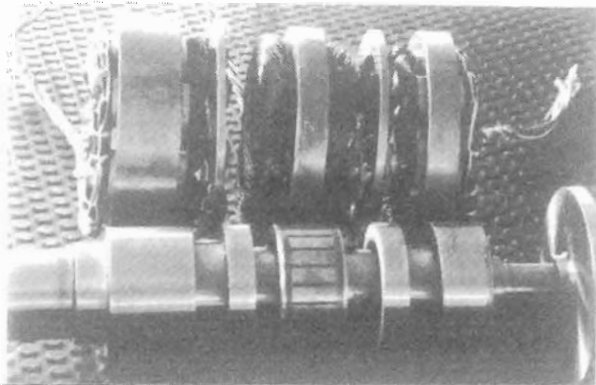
Stators of the radial actuators, sensors and of the electric motor together with the shaft.
